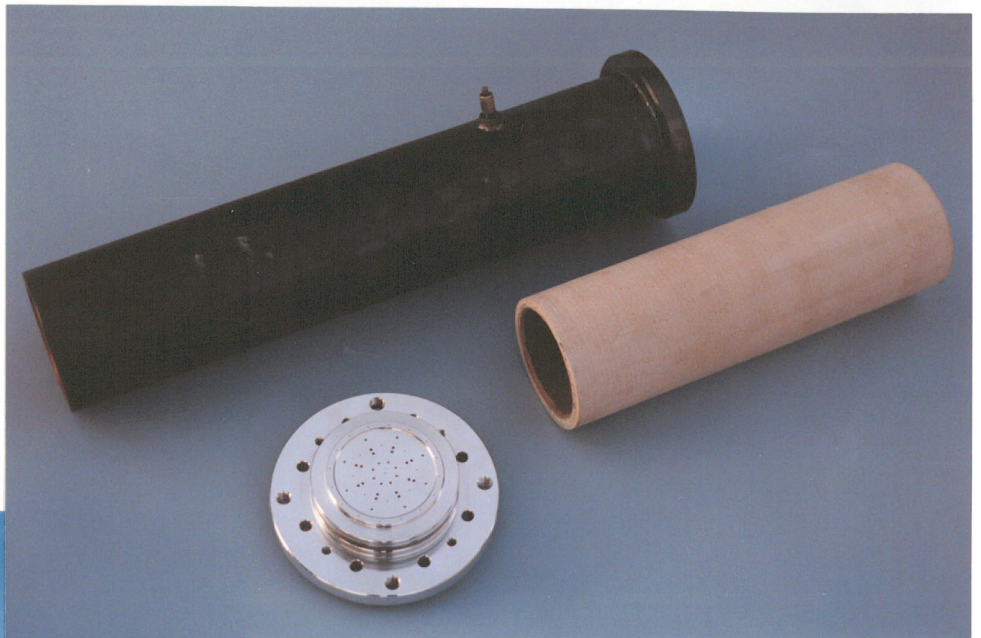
(Above) Thrust chamber housing, injector, and ablative liner ready for final assembly. The graphite nozzle has already been installed in the chamber housing.
